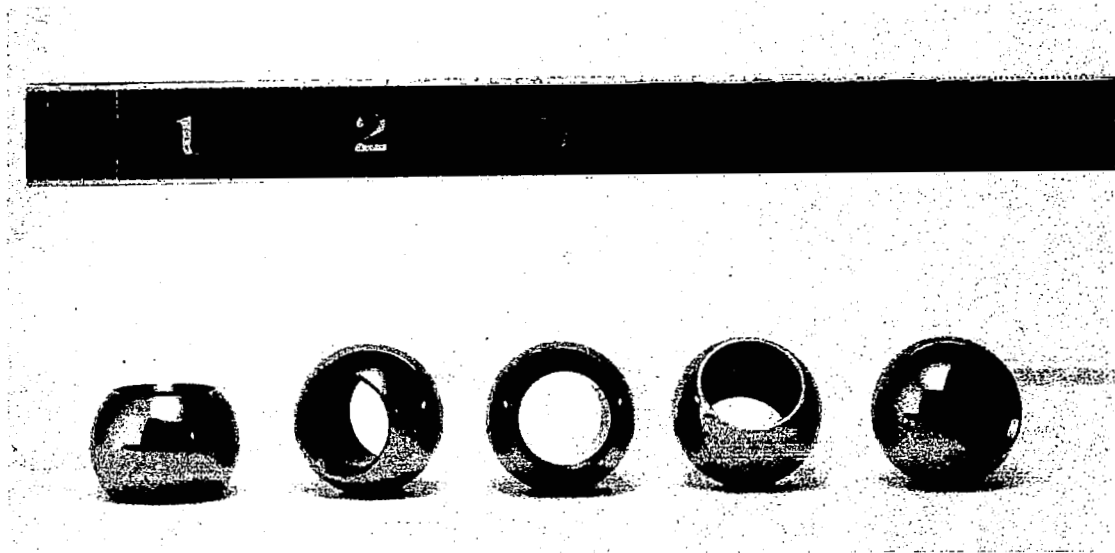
Appearance of Typical Drilled Balls – Bearing S/N 2552A-2
